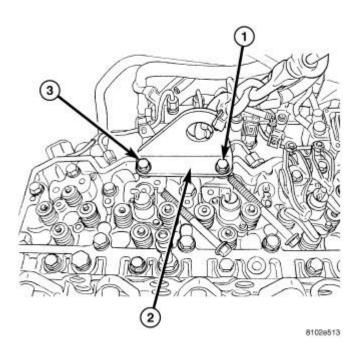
Engine Lift Bracket Courtesy of CHRYSLER GROUP, LLC
